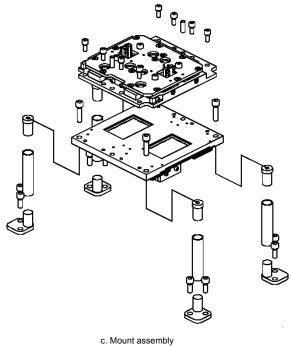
CCD mount assembly (courtesy of G. Luppino)
